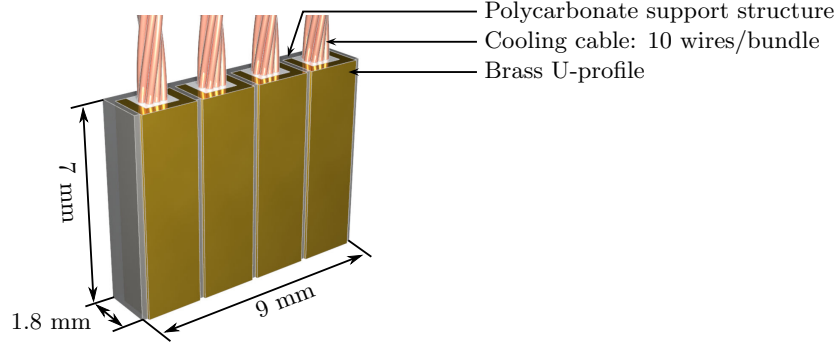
Pressed cooling contact. Four identical contact assemblies were used for thermally connecting ceramic sample holder to cooling pathways.
